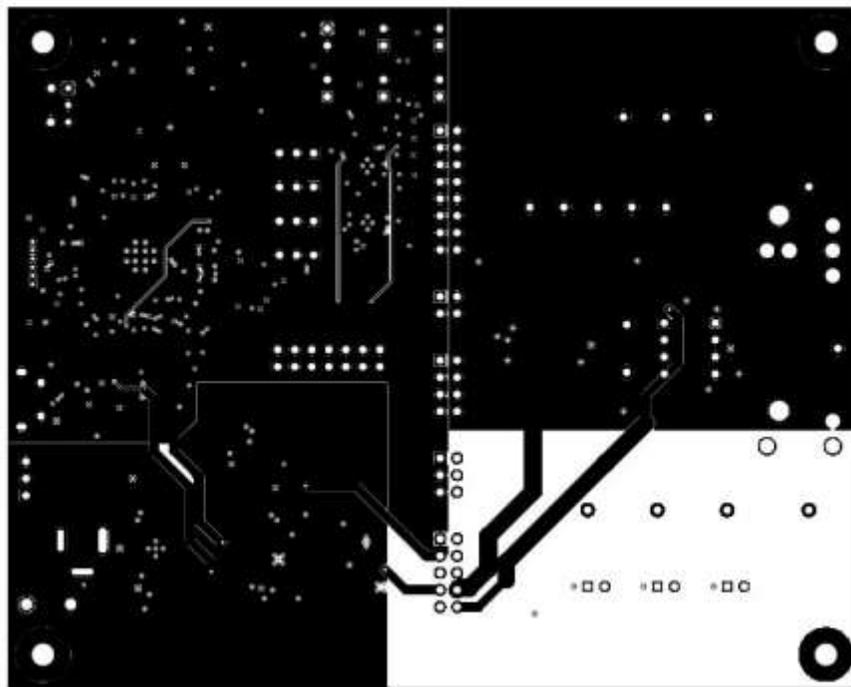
PCM175xEVM PCB Bottom Layer Layout
